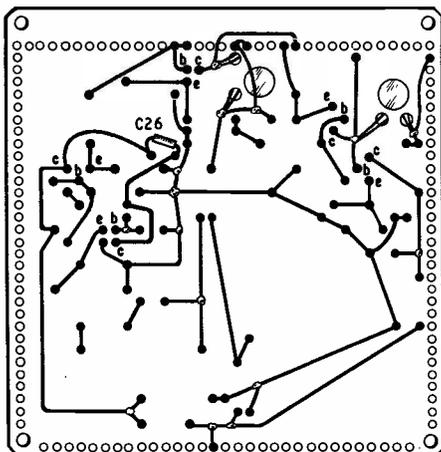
Veroboard layout and wiring details of the i.f. module
